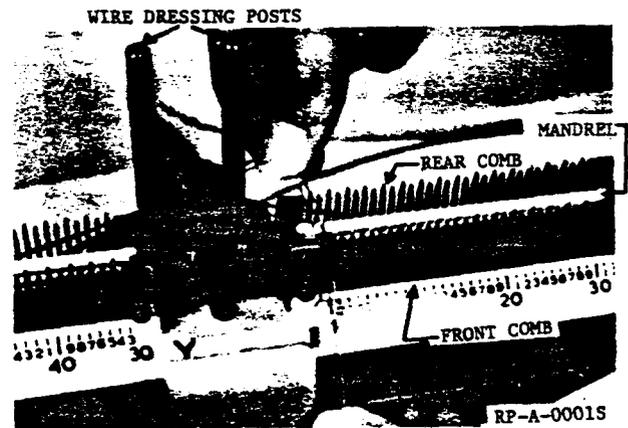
WIRE DRESSING (PAR. 4.2.1C)
